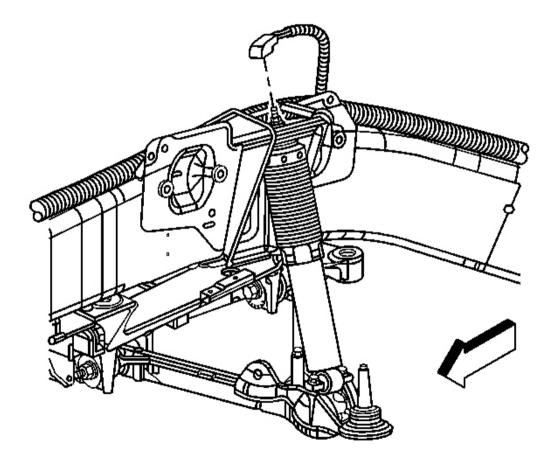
Front Shock ESC Harness Connector Courtesy of GENERAL MOTORS CORP.
